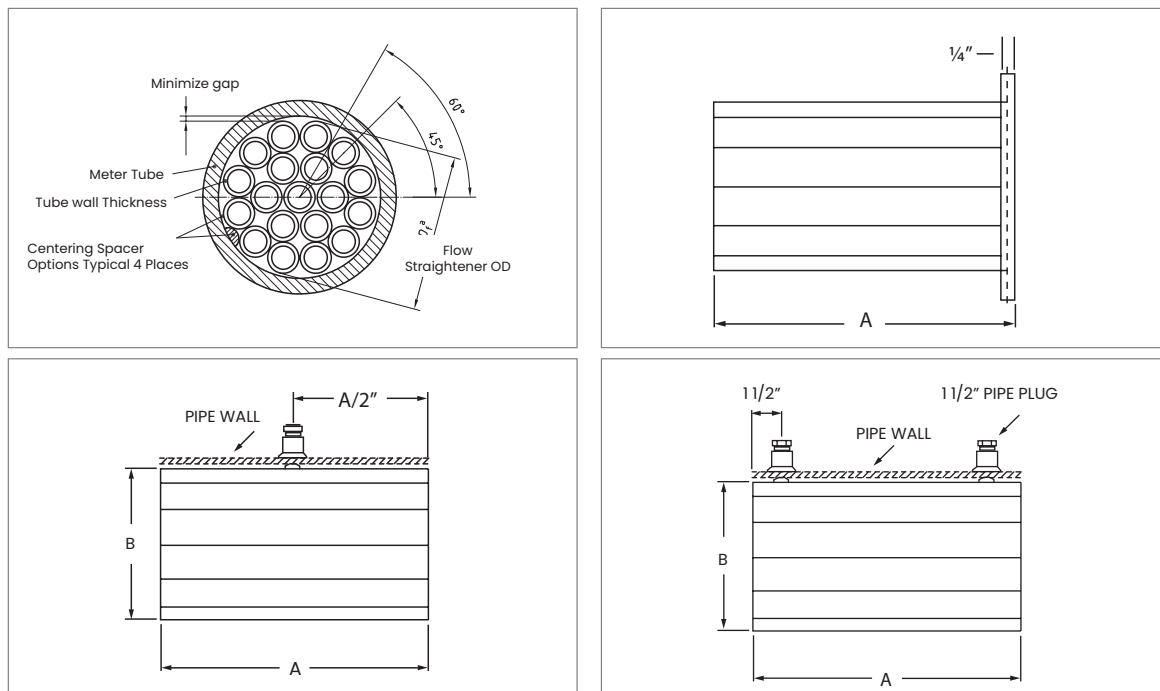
Tube Bundle Type (bolt in style and centre ring / top hat style – top right)
